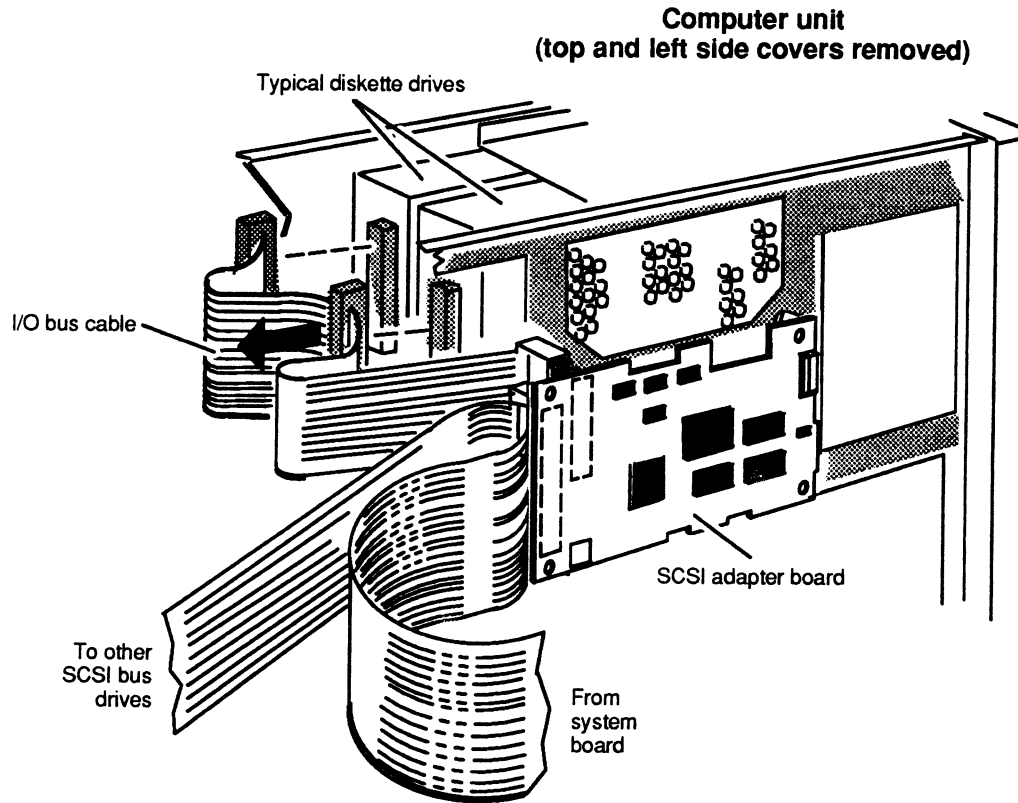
Unplugging the I/O Bus Cable from a Diskette Drive
